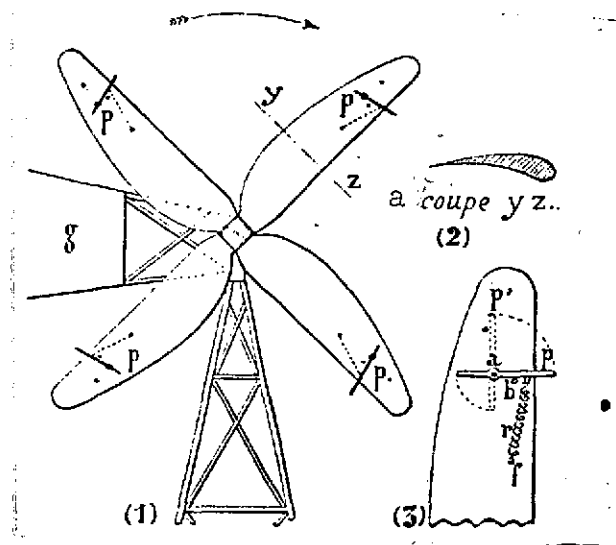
"Aerodynamo" wheel (Berlin) with brakes.
